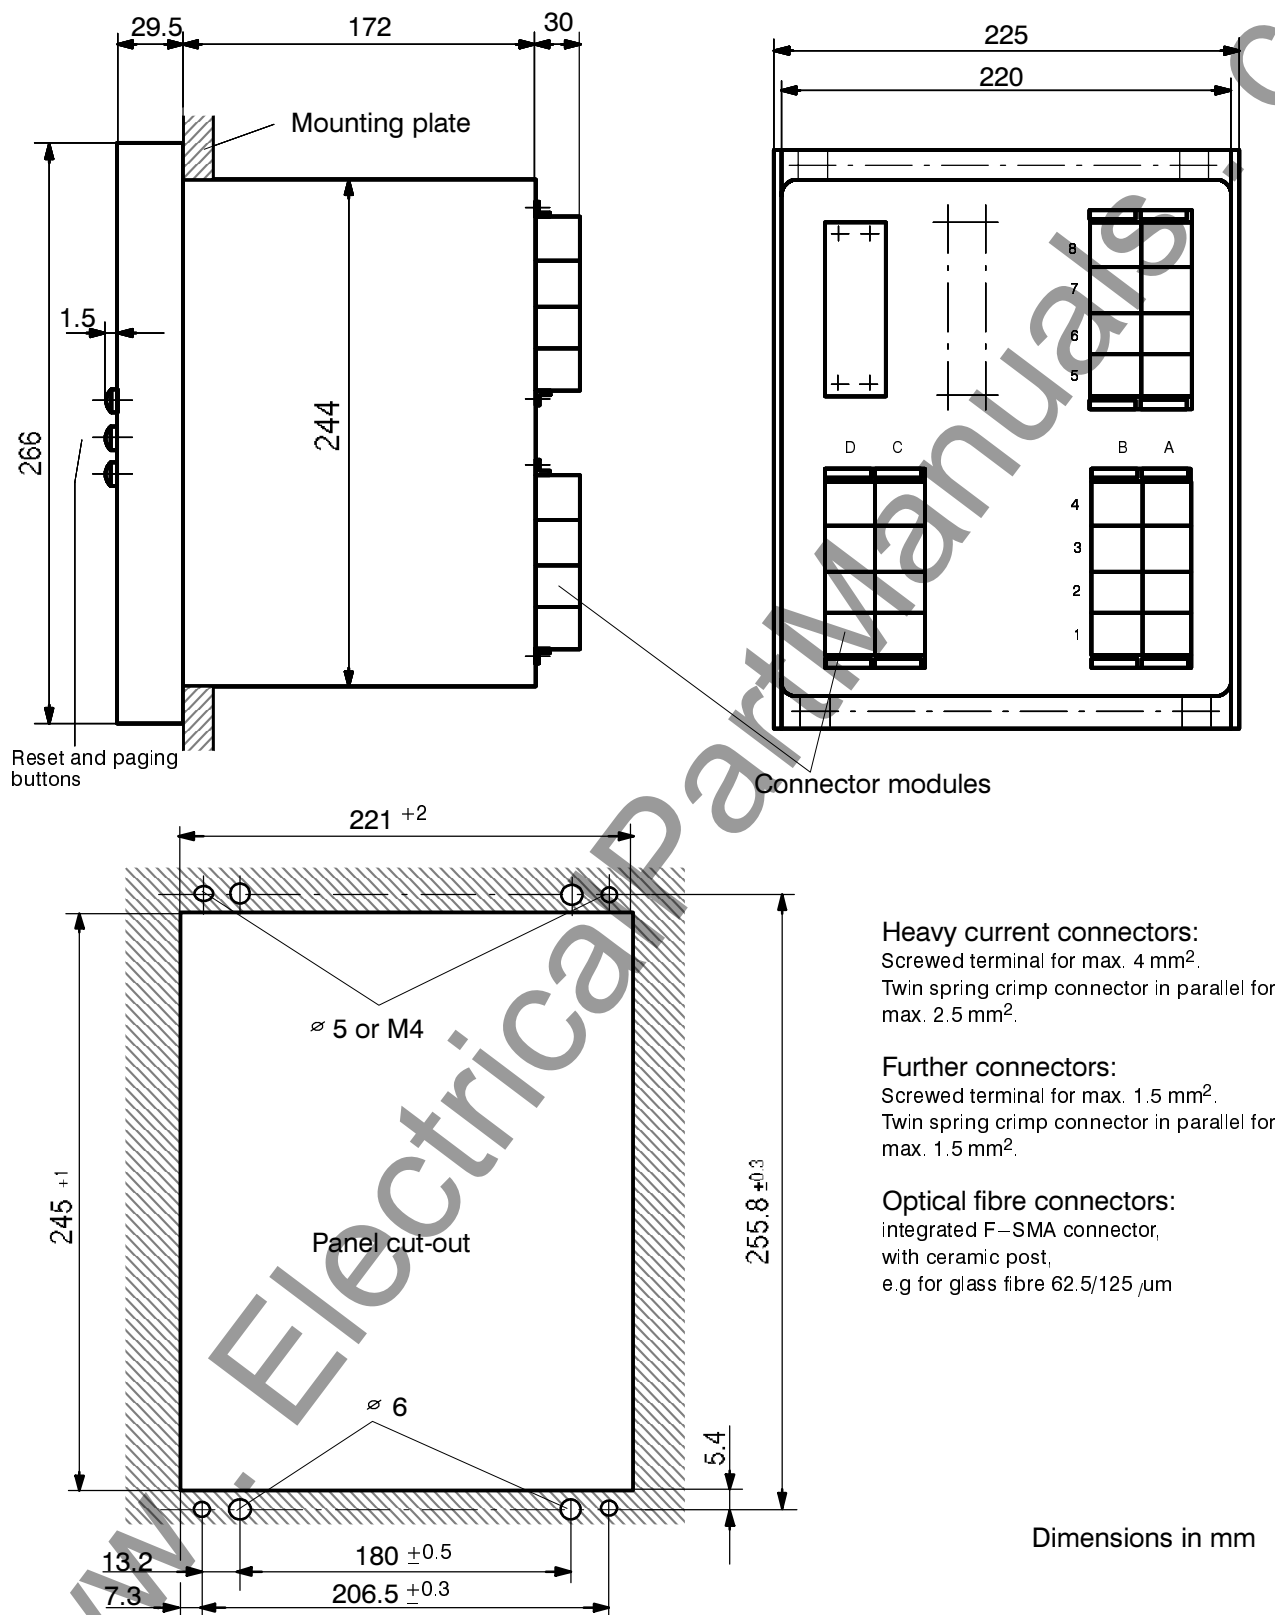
Dimensions for housing 7XP2040-2 for panel flush mounting or cubicle installation
